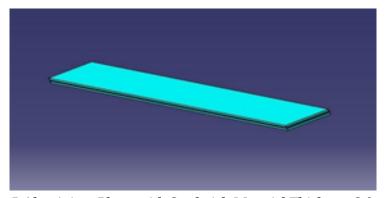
Aluminium Plates with Sandwich Material Thickness 2.0 mm
